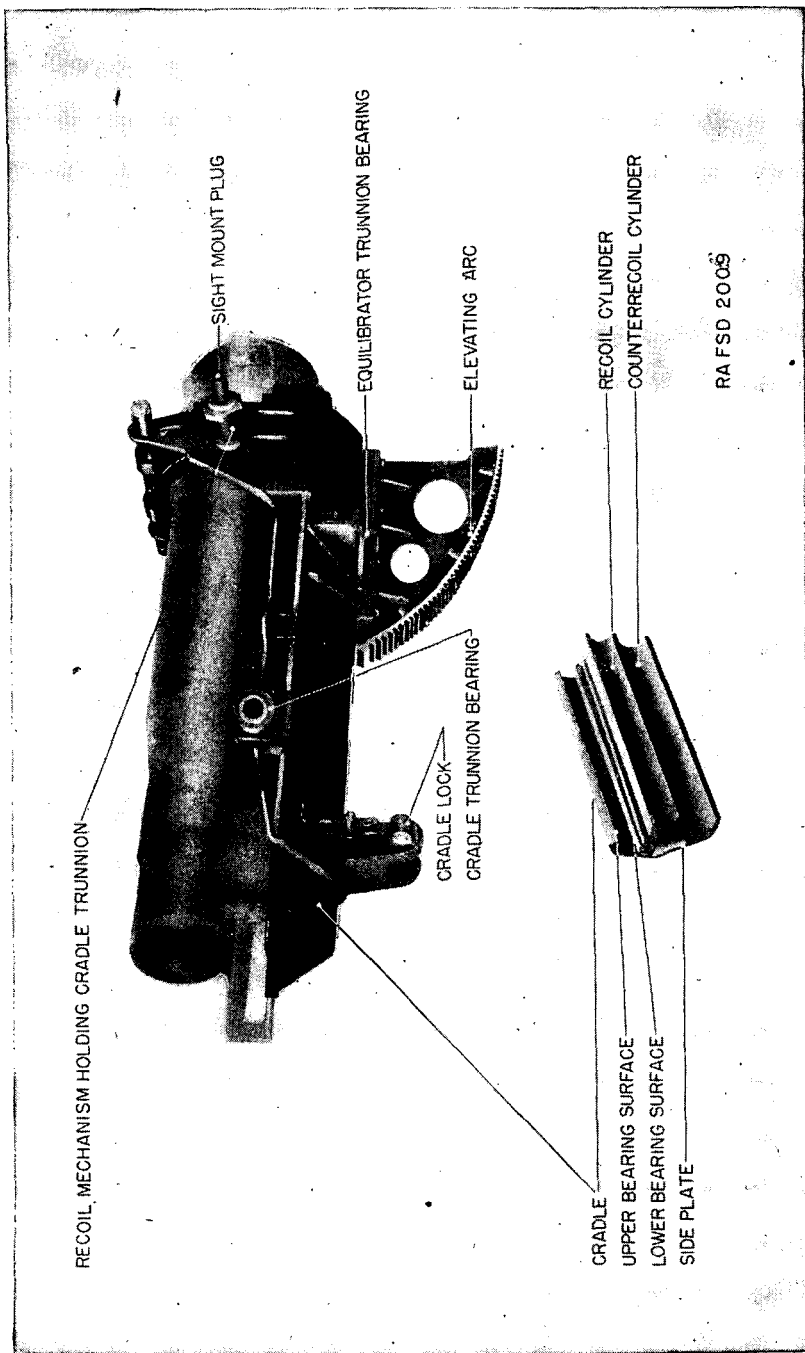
Cradle and recoil holding mechanism M2A2.
